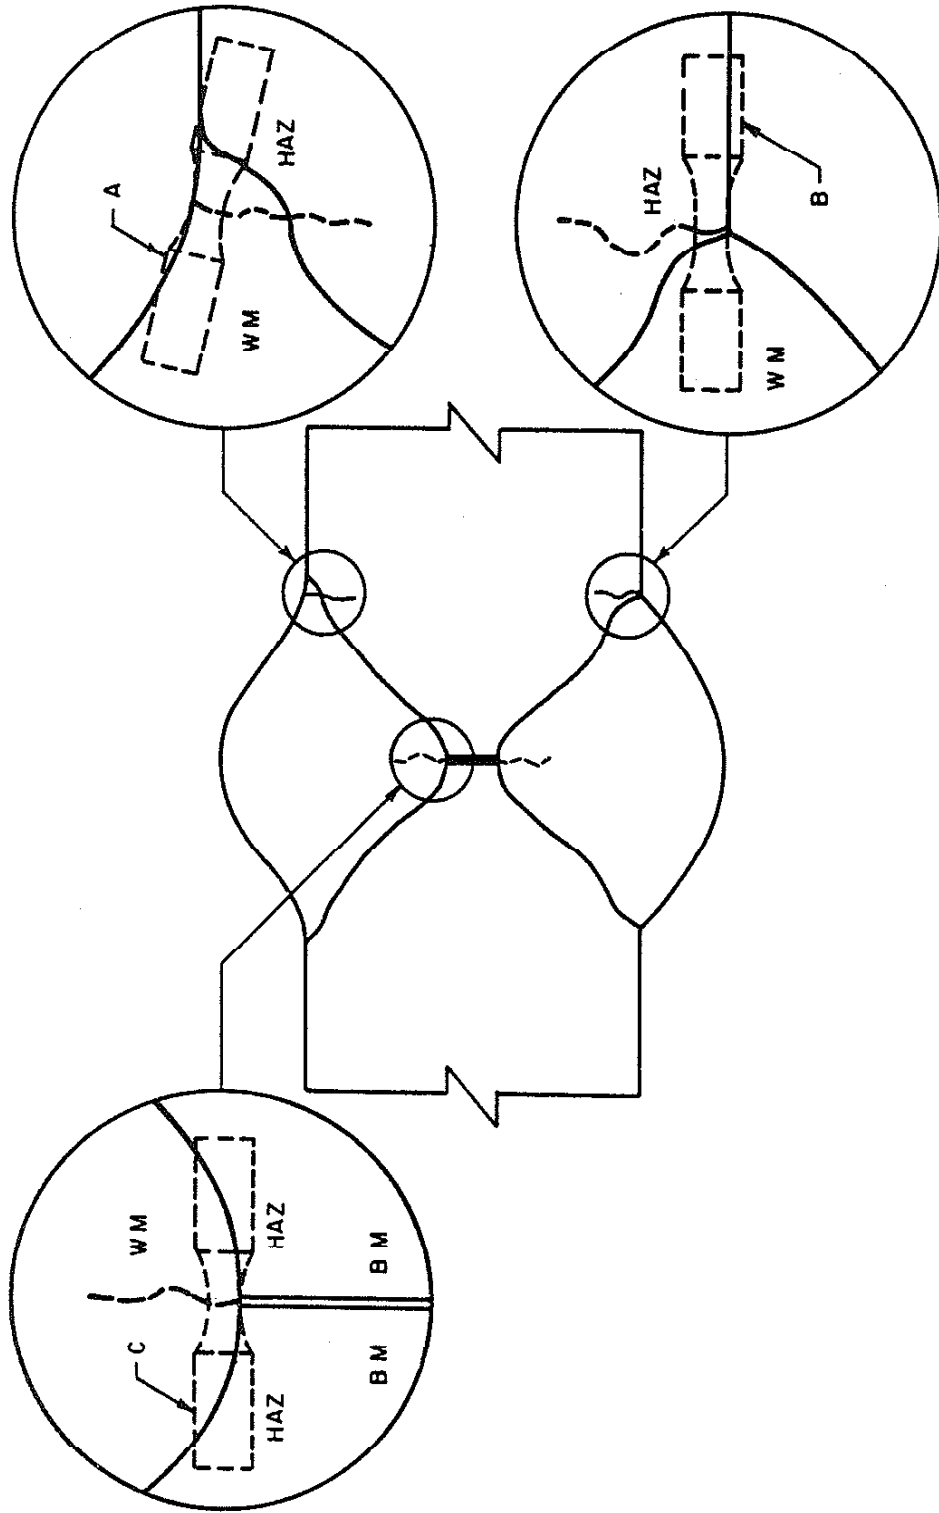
Typical Locations of Fatigue Crack Initiation in a Butt Weld. Fatigue Cracks Can Initiate: in Diluted, Untempered Weld Metal (A); in the Heat Affected Zone Close to the Line of Fusion (B); and in Tempered Weld Metal (C).
